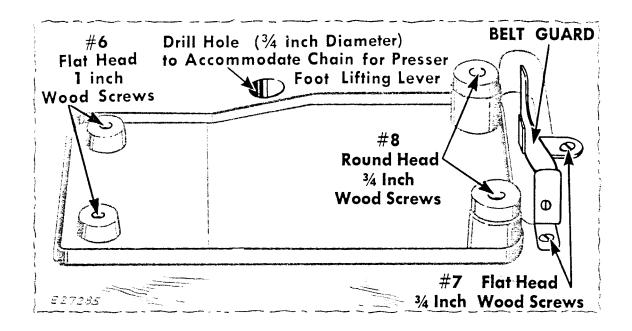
Machine Base on Table, Showing Position and Drill Sizes of Holes Required for Installation
